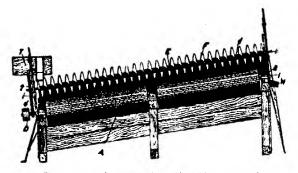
Longitudinal view of the machine with cover removed, showing arrangement of drum and feed screw.
